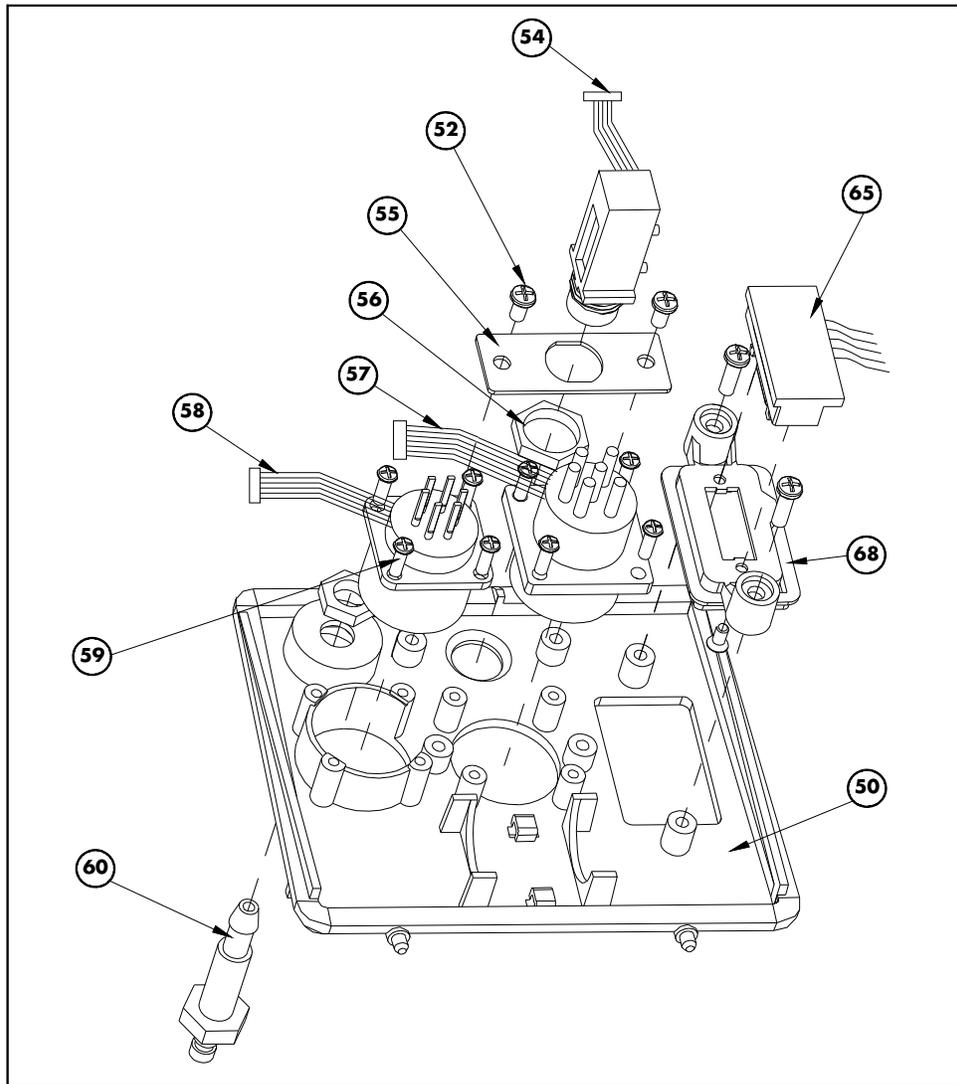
Right Side Panel Sub-Assembly (Nellcor)
